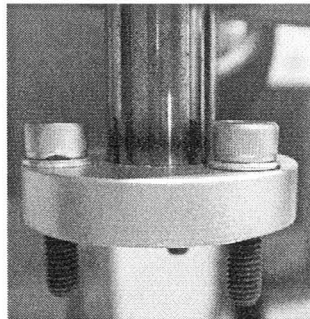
Splined Shaft Torque Sensor Connector– Torque Sensor Removed
